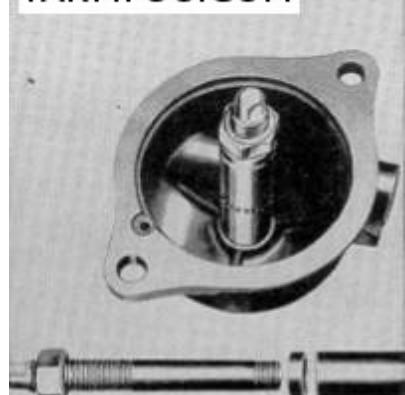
Removing and installing shaft bushing on models 2N-8N-9N.
